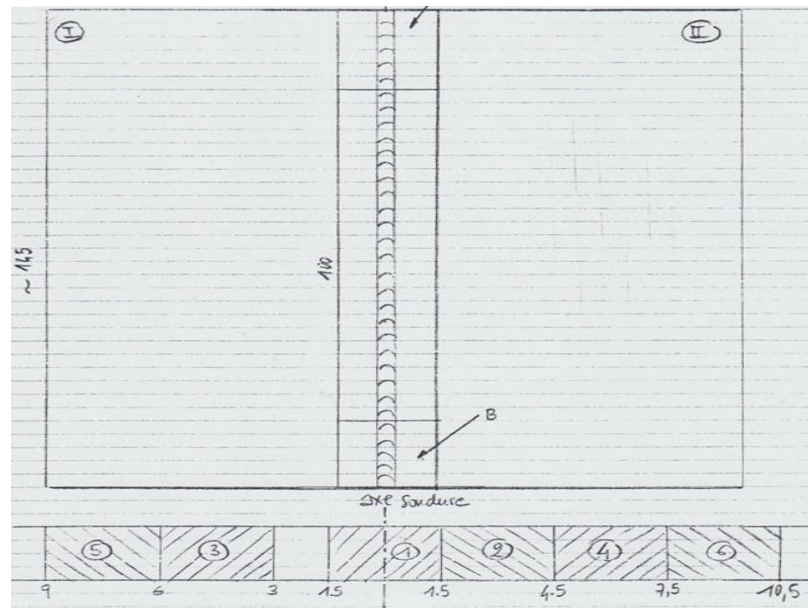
Schematic drawing of the position of the samples for RRR measurements with the relative distances in millimeters of the samples to the weld bead
